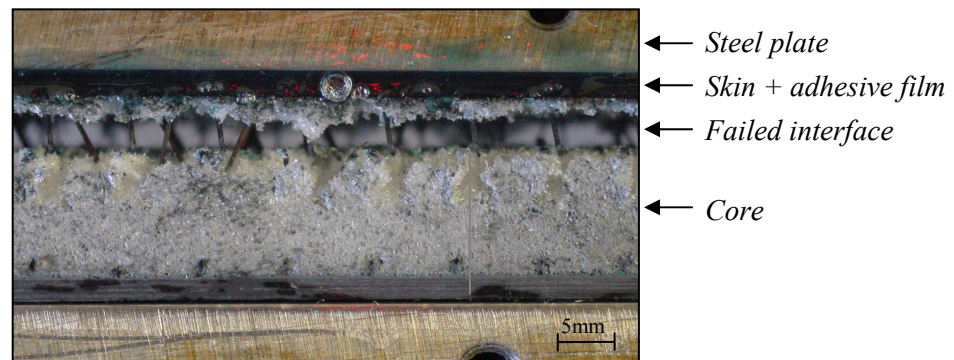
Typical K-Cor failure mode; fixture steel plates moved apart to show the failed skin-core interface
